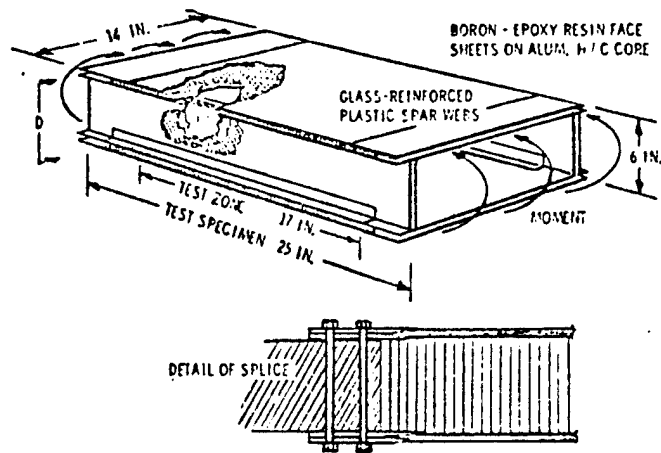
Design and Major Dimensions of Advanced Composite Box Beam Test Specimen (83)
